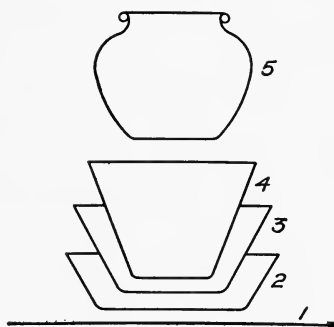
Steps in Shaping Sheet Metal by Drawing and Spinning.
